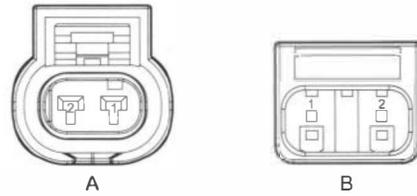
Front Exhaust VVT Phaser [270FE-1]
